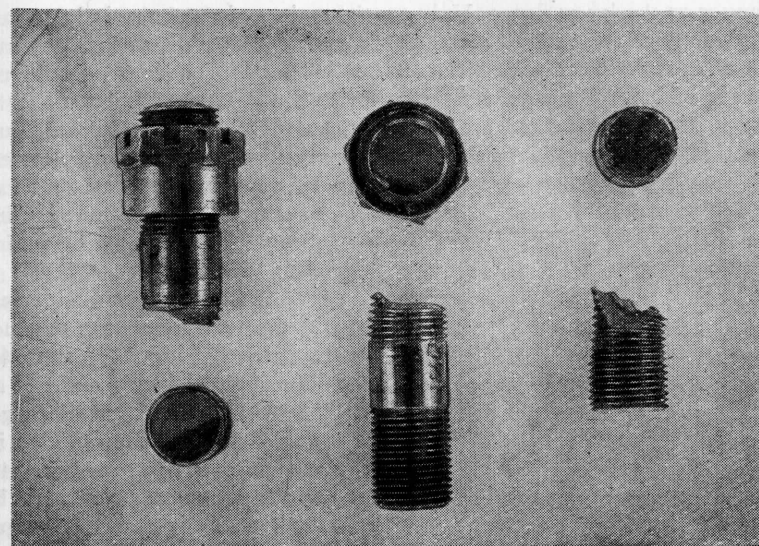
An M 12/1 bolt fractured in operation. Left: fatigue fracture, right: static fracture.
